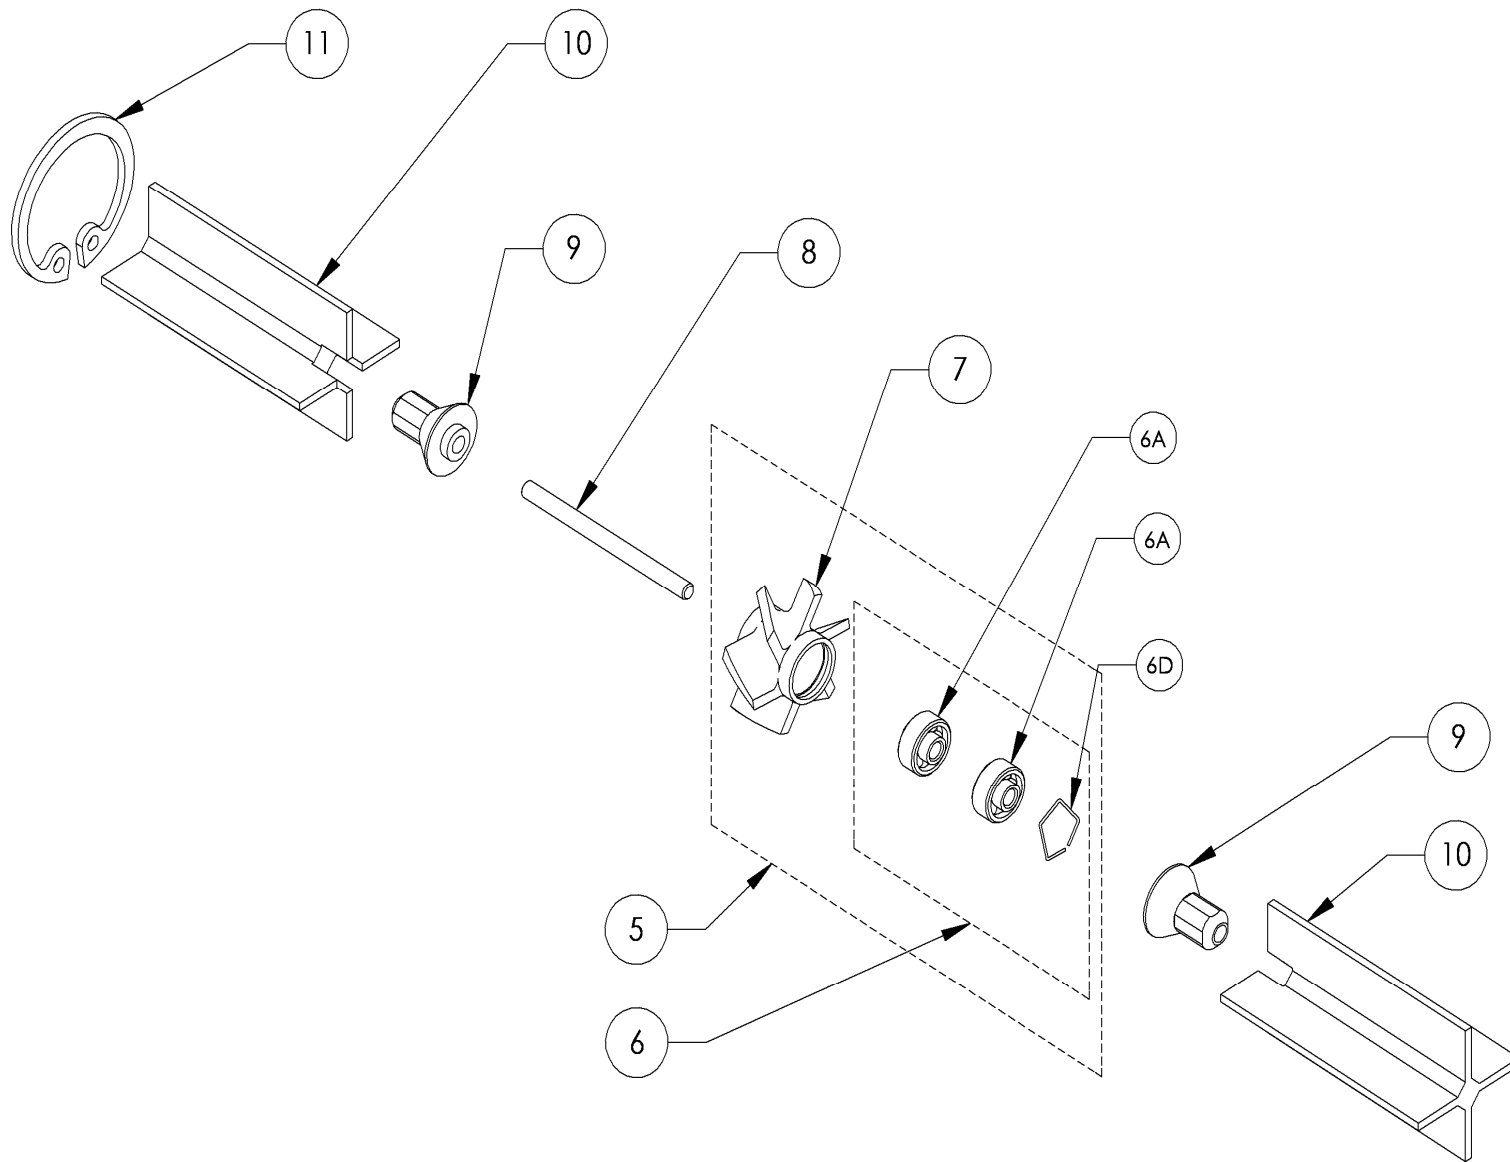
HS6-8, 8-8, & -08 Ball Bearing Internal Assembly (Bearing Code A)
